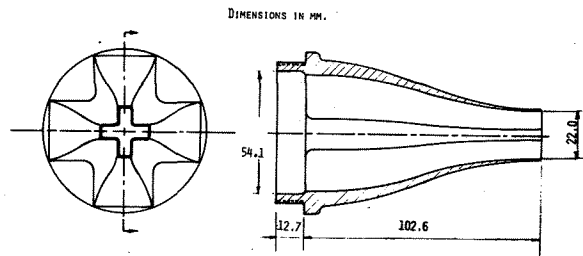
Sketch of the Long Cruciform Nozzle used by Montasser (10).
